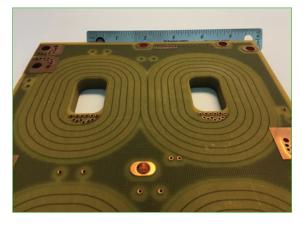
And this 38-layer solid state rectifier (solder mask removed).
